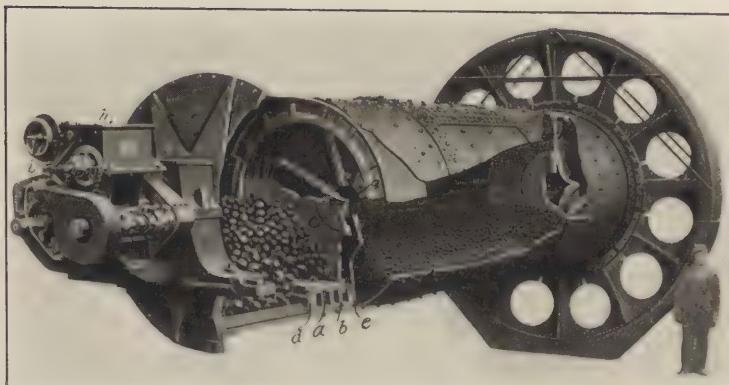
Compeb-mill equipped for dry grinding—Allis-Chalmers Mfg. Co.
